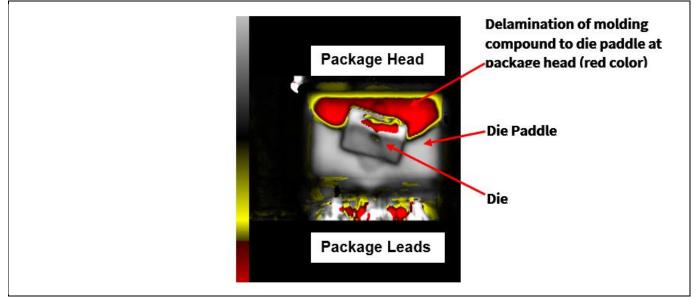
C-scanning acoustic microscopy (CSAM) image showing the delamination of molding compound to die paddle interface at the package head (TO220).
